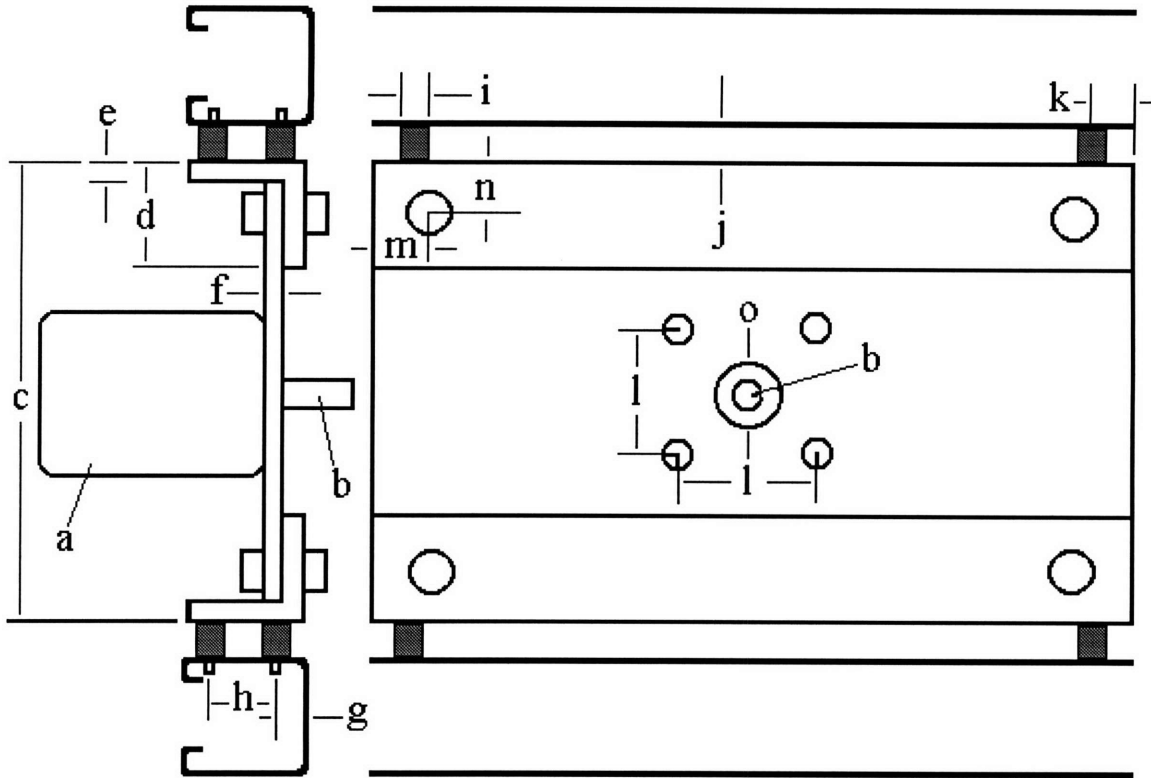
Motor Mount Assembly with Final Damping Coupling Configuration
